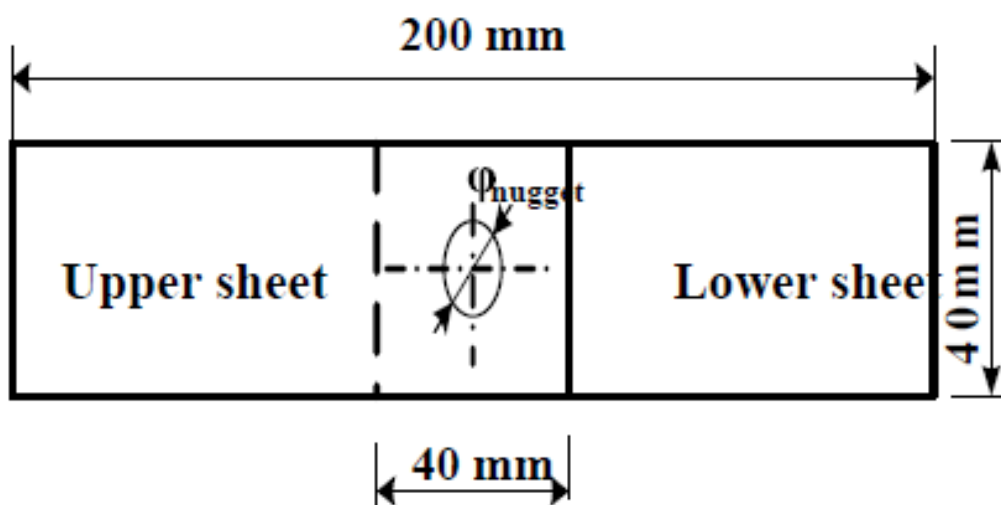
Dimensions of resistance spot-weld specimen (mm)
